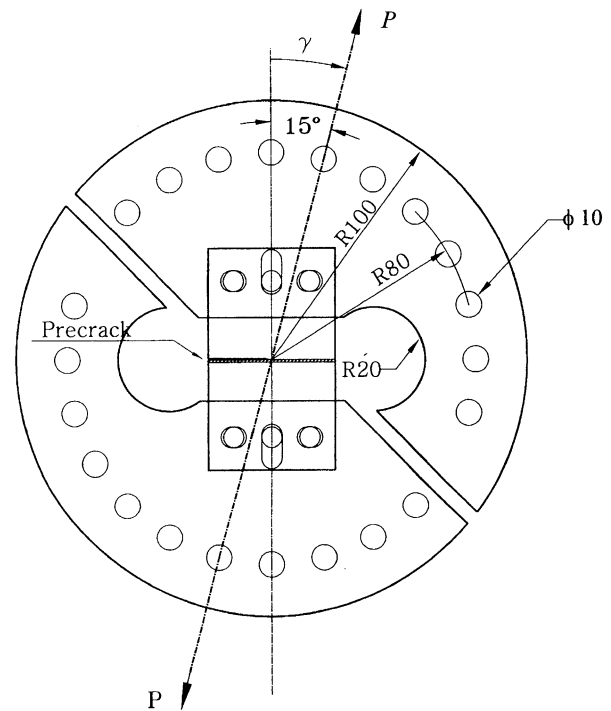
Grip and specimen assembly. Thickness of plate: 10 mm.
